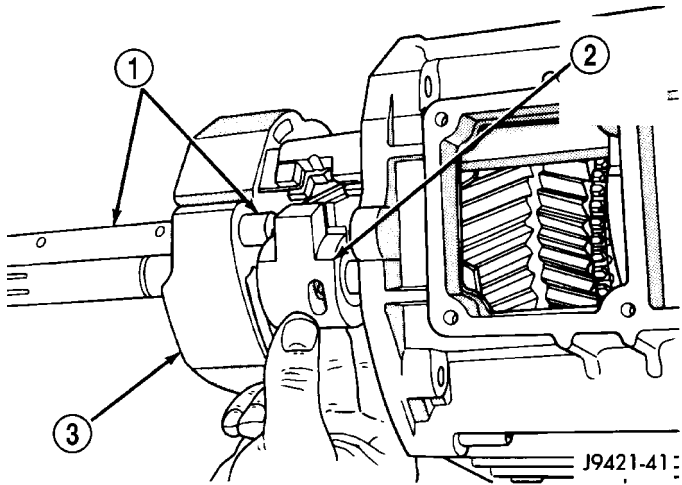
SHIFT SHAFT LEVER AND BUSHING
